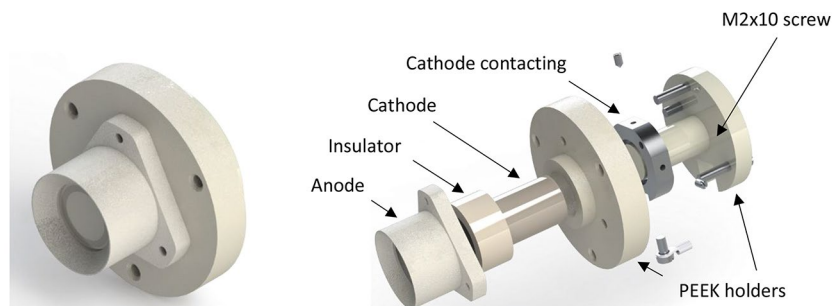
Thruster head of the VAT; Left: Total view; Right: Exploded view
